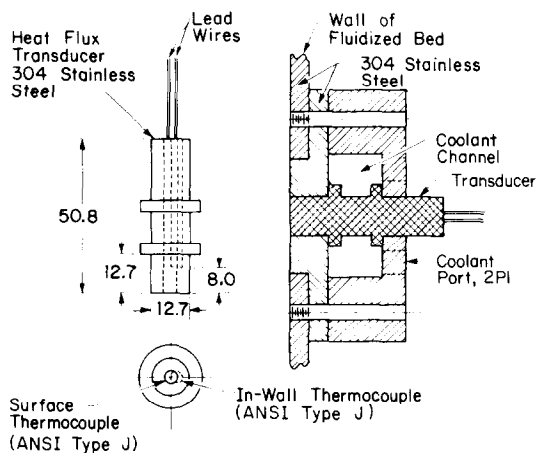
Heat flux transducer and mounting fixture. Dimensions are in millimeters.
